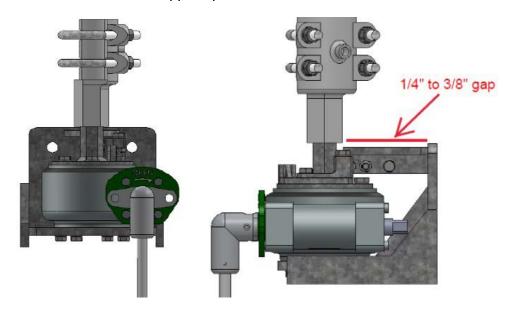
Type SEGO (Safety Enhanced Gear Operator)
